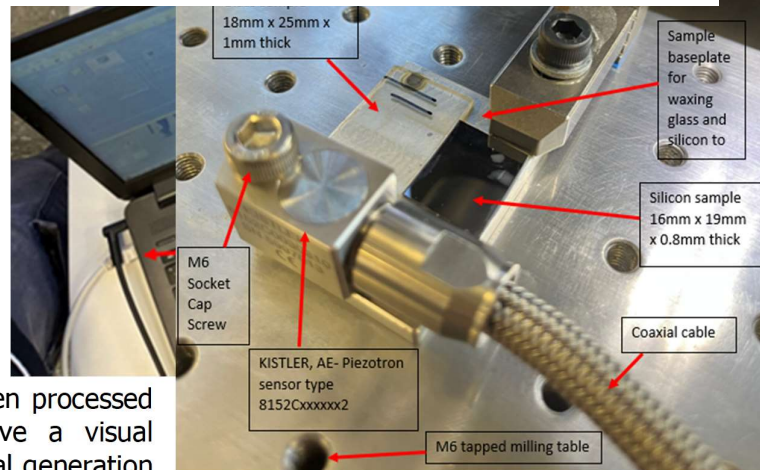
Experimental setup for TCM machining mounted to Base plate of CNC Mini-Mill.
